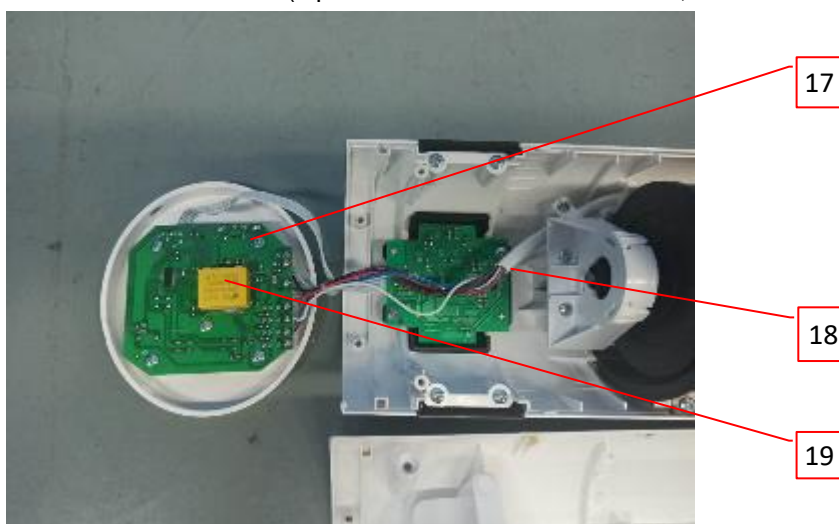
Display PCB view for NDTFT14RH (Optional PCB 1 for NDTFT14RH, NDTFT14RL)
